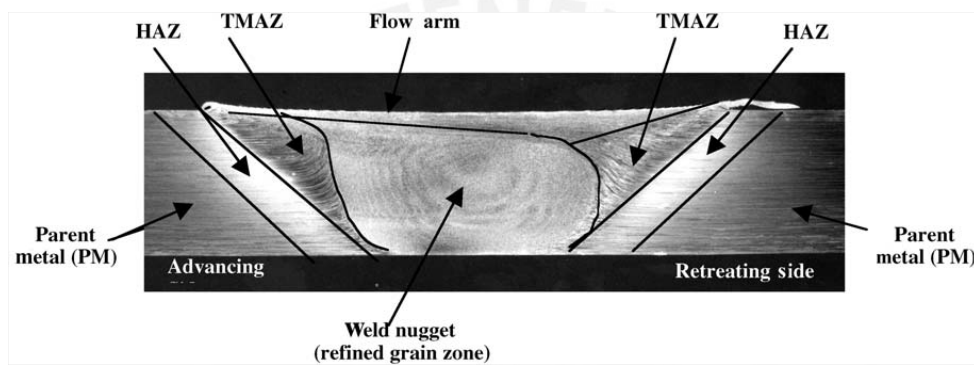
Transverse section of a friction stir weld showing different regions of the weld [MM07]
